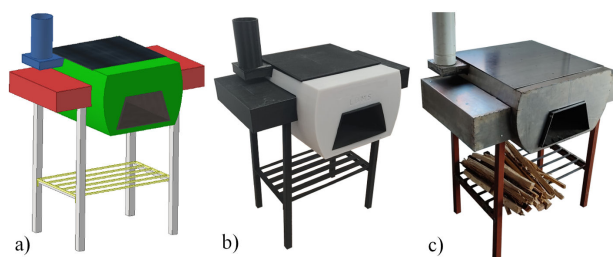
a) CAD design, b) prototype, c) manufactured stove [27].
